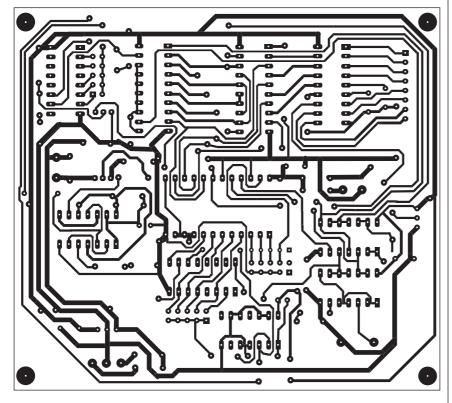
Actual-size, single-sided PCB for circuits shown in Figs 1 and 2
